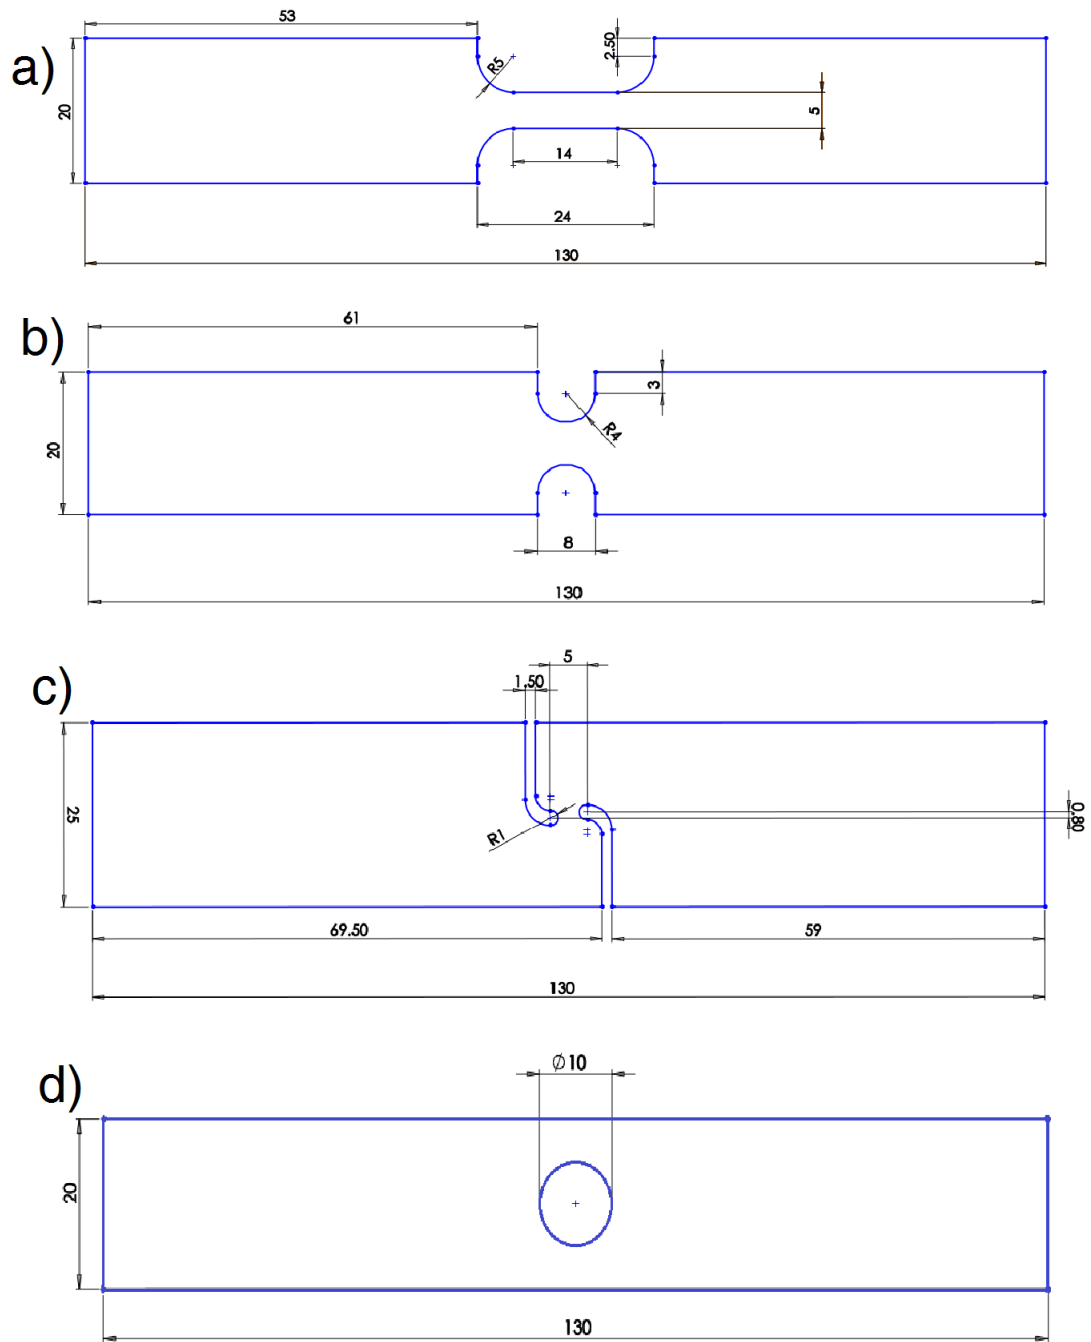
Final tensile specimen designs. All dimensions shown in mm. a) Tensile dog-bone b) Plane-strain c) Shear d) Uniaxial central-hole
